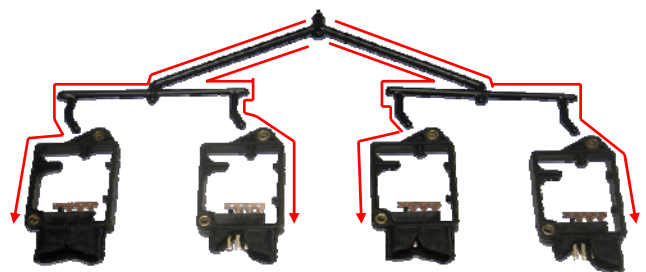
4-cavity parting line inject runner layout modified with artificial balancing techniques, which overcompensated filling to cavities 1 and 3.
